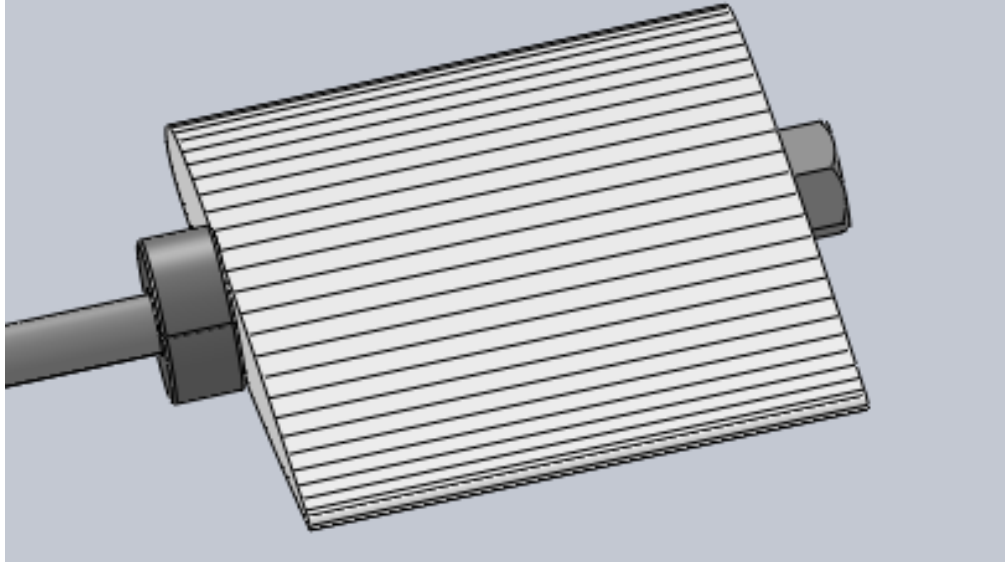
Assembly of Hydrofoil on Hydrofoil Shaft
